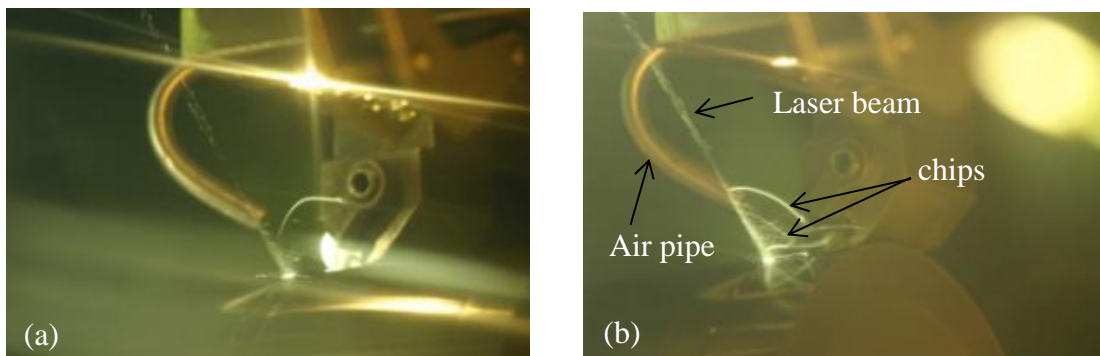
a) Laser beam hitting the surface to be machined, b) Laser beam hitting some chips causing them to ignite
